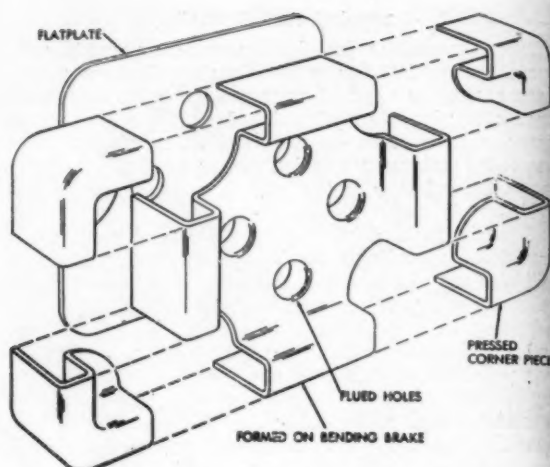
Diagram of the water-cooled furnace door, showing construction.
